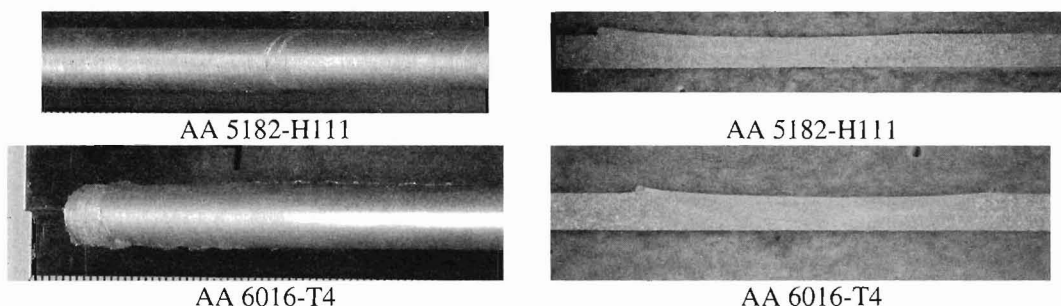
Appearance of the surface and cross section of welds of the first series in alloys AA 5182-H111 and AA 6016-T4.
